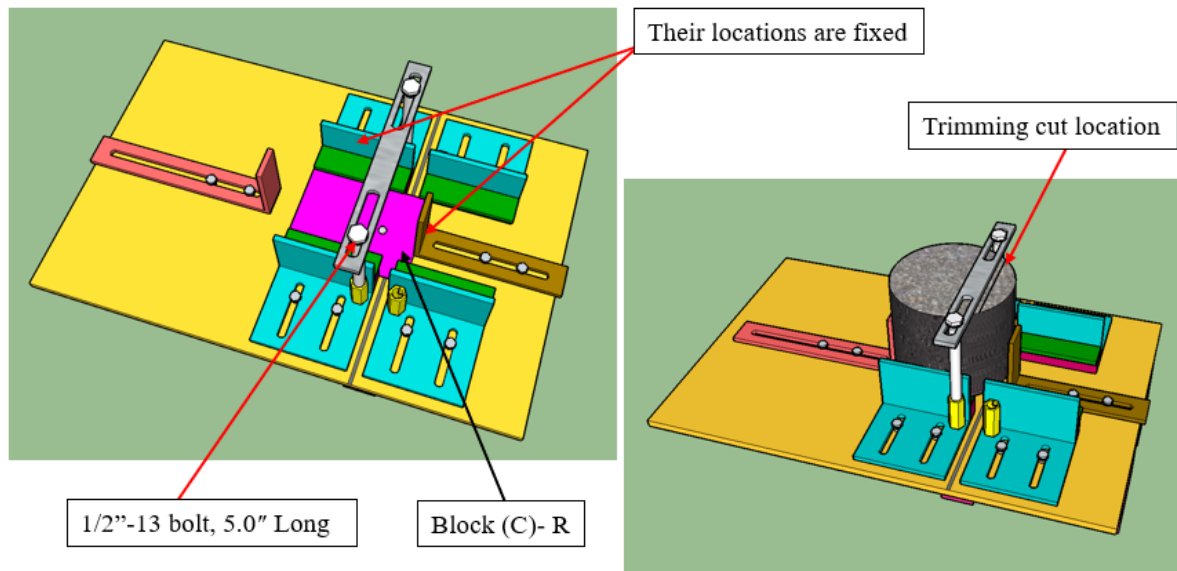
Illustration drawings to the first trim of RV specimens.
